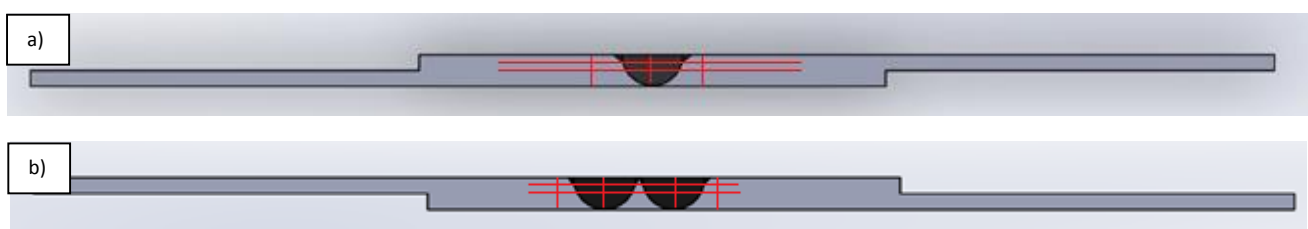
Lines of the profiles tested to obtain the hardness with a) 1 welding pass; b) 2 welding passes.
